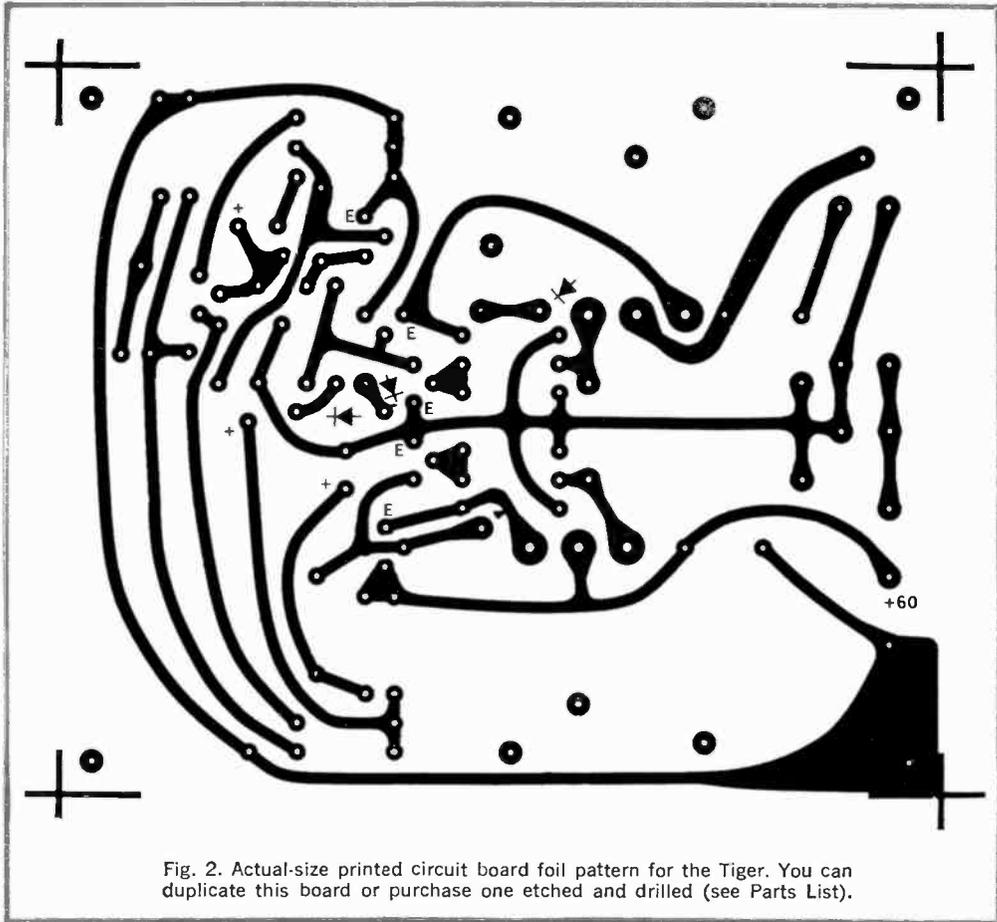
Actual-size printed circuit board foil pattern for the Tiger. You can duplicate this board or purchase one etched and drilled (see Parts List).
